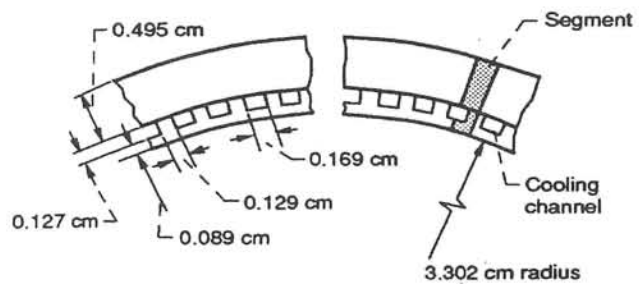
Cylinder wall cross section showing analyzed segment and dimensions.
